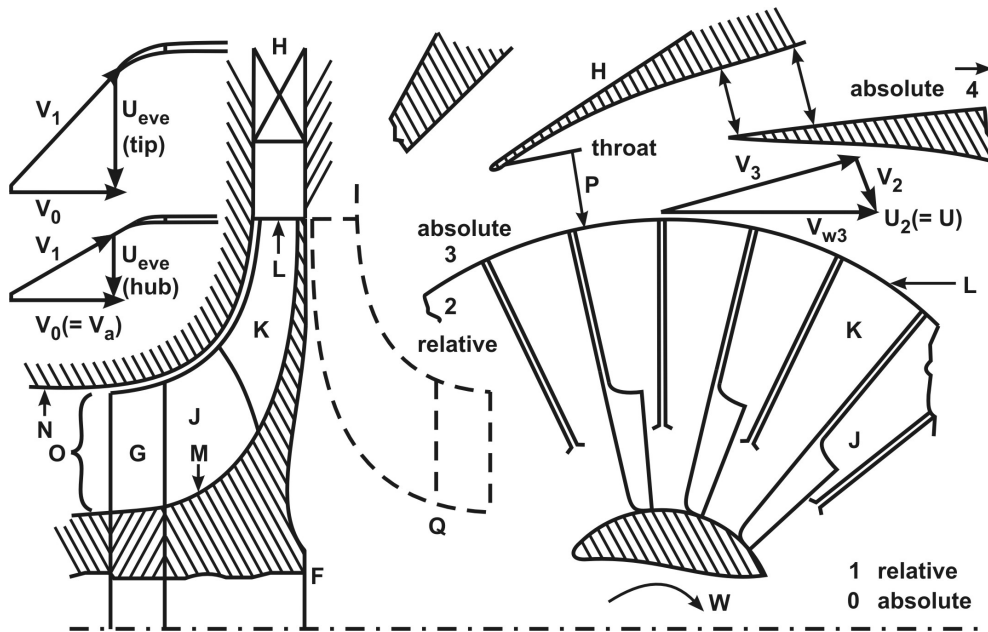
Details of a single sided compressor with channel-type diffuser. (G is the inducer with rotating guide vanes, H is the diffuser, J is the impeller vane, K is a half vane, L is the impeller outer limit, M is the impeller hub, N is the shroud, O is the impeller eye, P is the vane-less gap. Notice the twist in the vane close to the hub as also seen in the velocity diagram at the top left)
